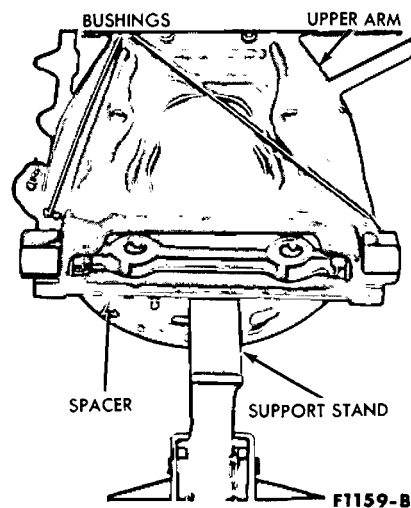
Torque Upper Arm Inner Shaft Bushings—Typical
